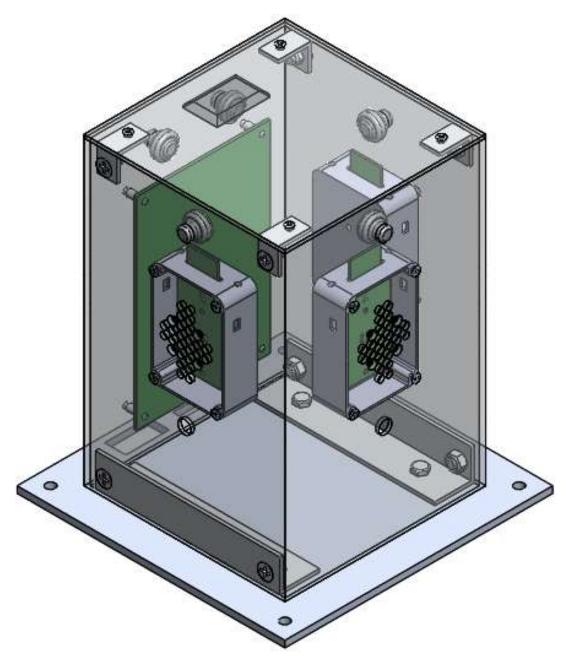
(o) Design of all sides view of the payload mounted on the HASP plate.
